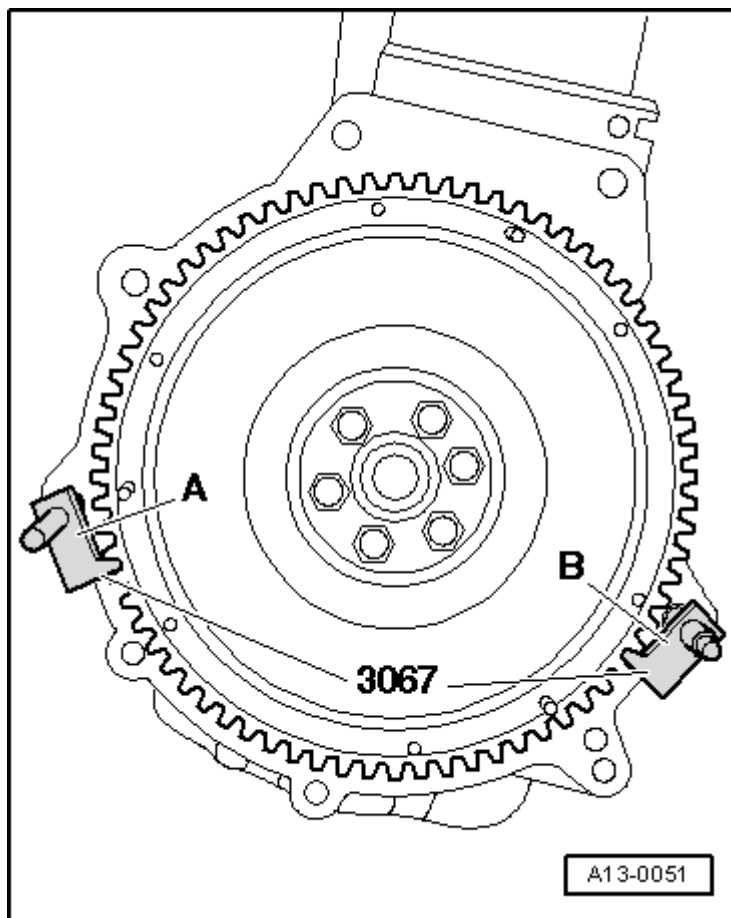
Identifying Retainer -3067- Inserted In Hole On Cylinder Block
